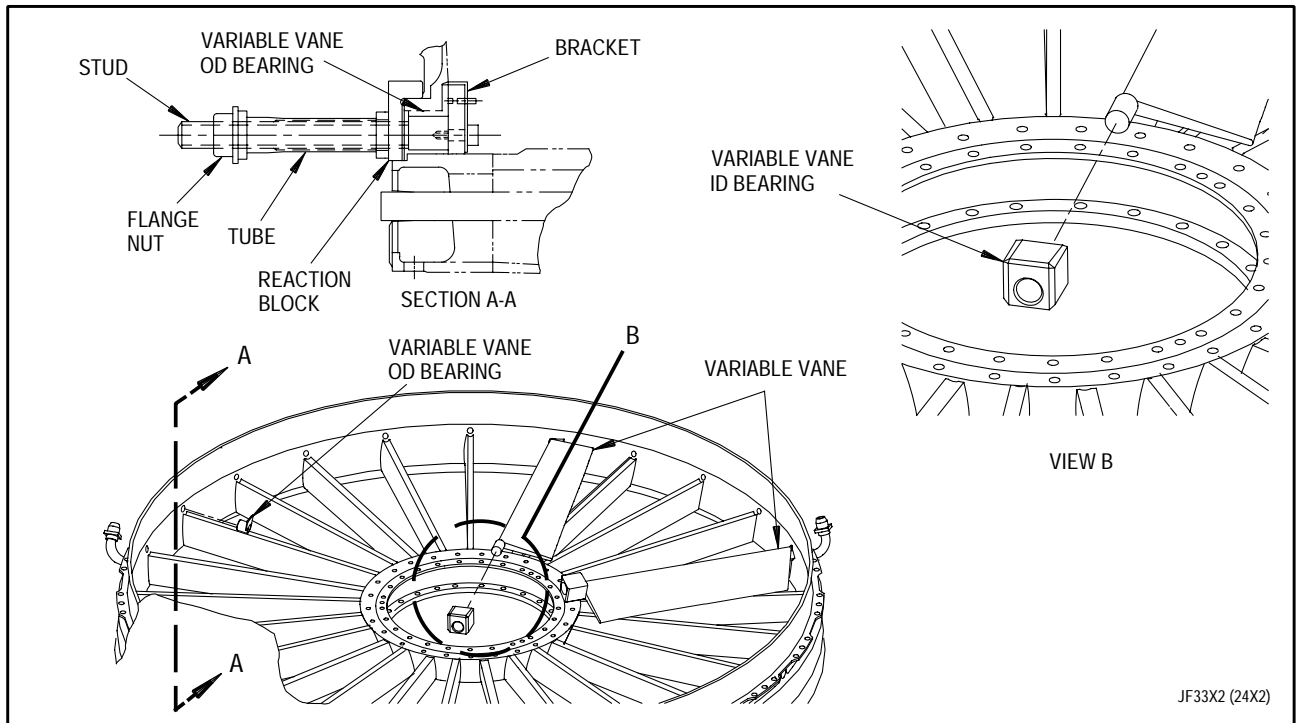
Front Compressor Stator Variable Inlet Vanes - Installation (Sheet 1 of 2)
